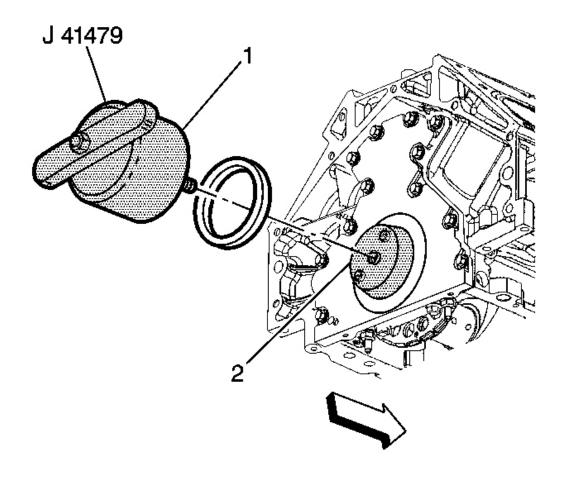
Installing Crankshaft Rear Oil Seal Using J 41479 Courtesy of GENERAL MOTORS CORP.
